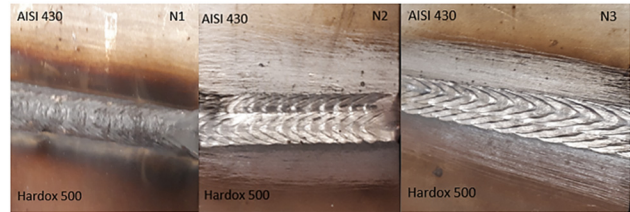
View of the macrostructures of the welded metal pair.
